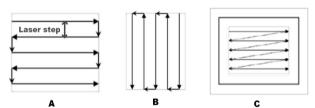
Used variants of the weld cladding coating creation strategy
